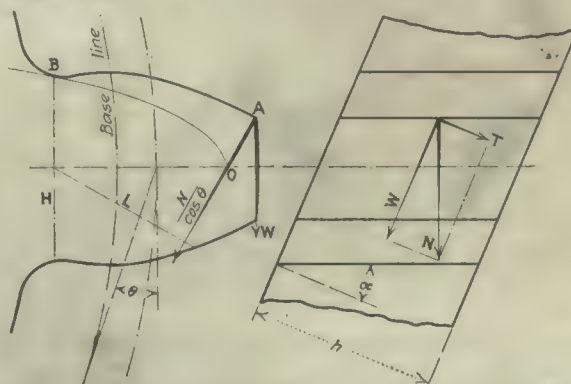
FORCES ACTING ON HELICAL TOOTH
